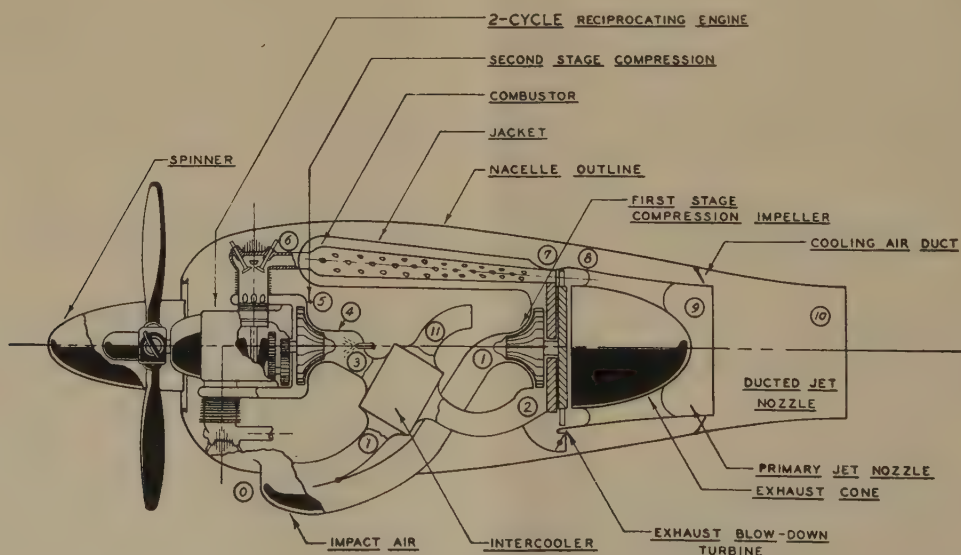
TURBO TOPPING POWER-PLANT INSTALLATION COMPOSED OF A MECHANICALLY SUPERCHARGED TWO-STROKE-CYCLE "TOPPING" ENGINE, SEVERAL COMBUSTORS, A TURBOSUPERCHARGER AND DUCTED JET NOZZLE
